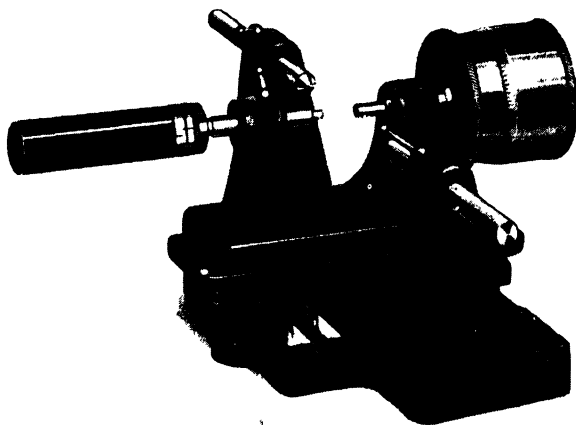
P.V.E. DIAMETER-MEASURING MACHINES
